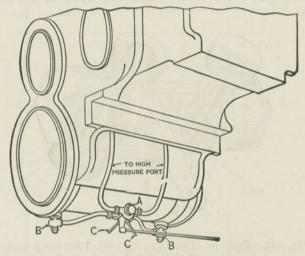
Baldwin (Vauclain) Combined Starting-Valve and Cylinder-Cock.
